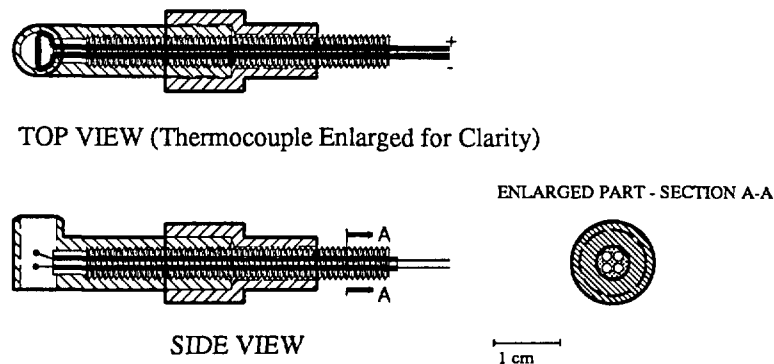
Cross-sectional view of modified thermocouple probe showing double thermocouples.
